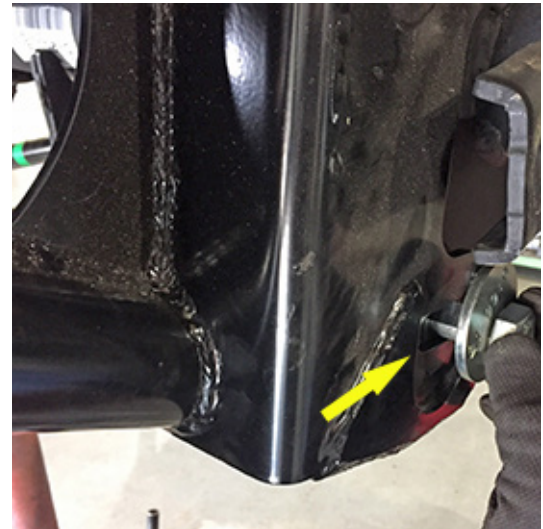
Unbolt the radius arm from the frame and the axle, then remove. {frame bolt 24mm, nut 27mm; axle 24mm}
